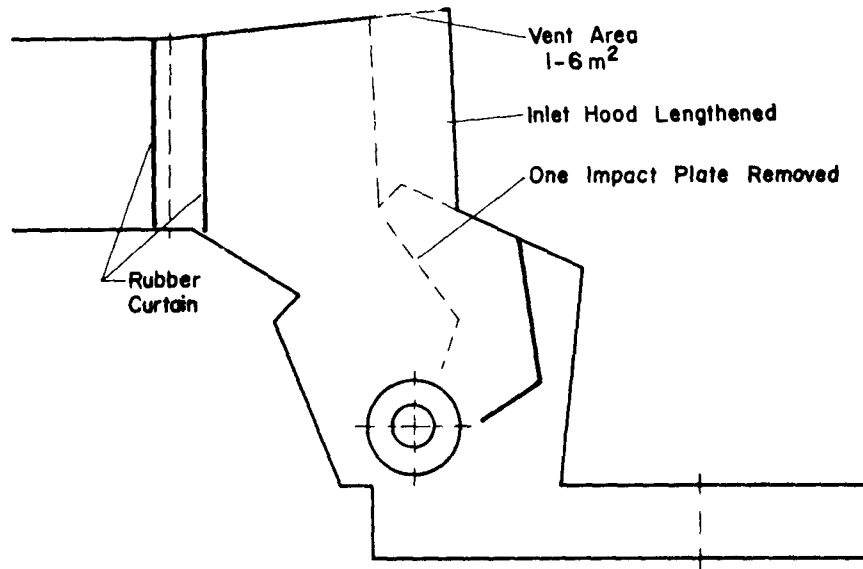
MODIFIED HAMMERMILL USED IN SCHOLL'S EXPLOSION VENTING;
